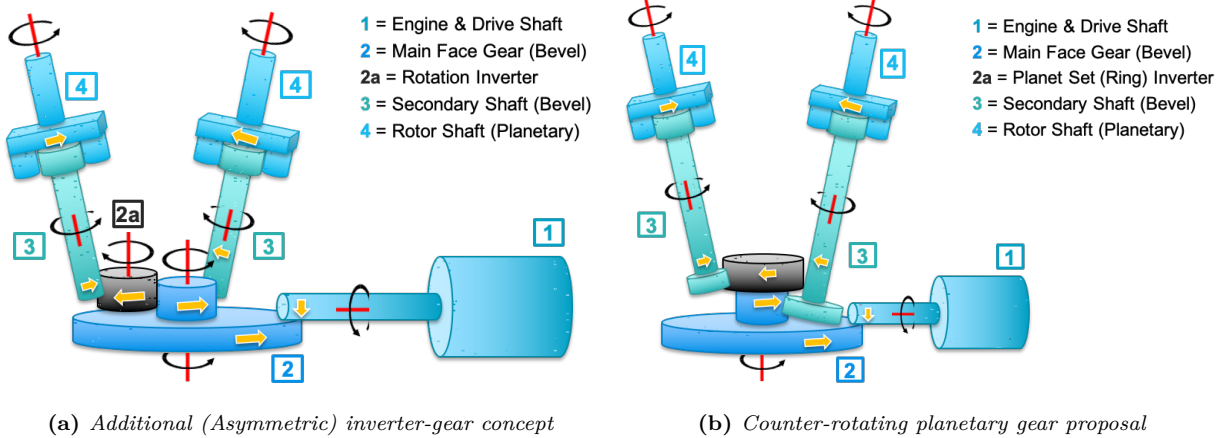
Rejected designs for the synchropter transmission, based on a large single main rotor-esque face gear.
